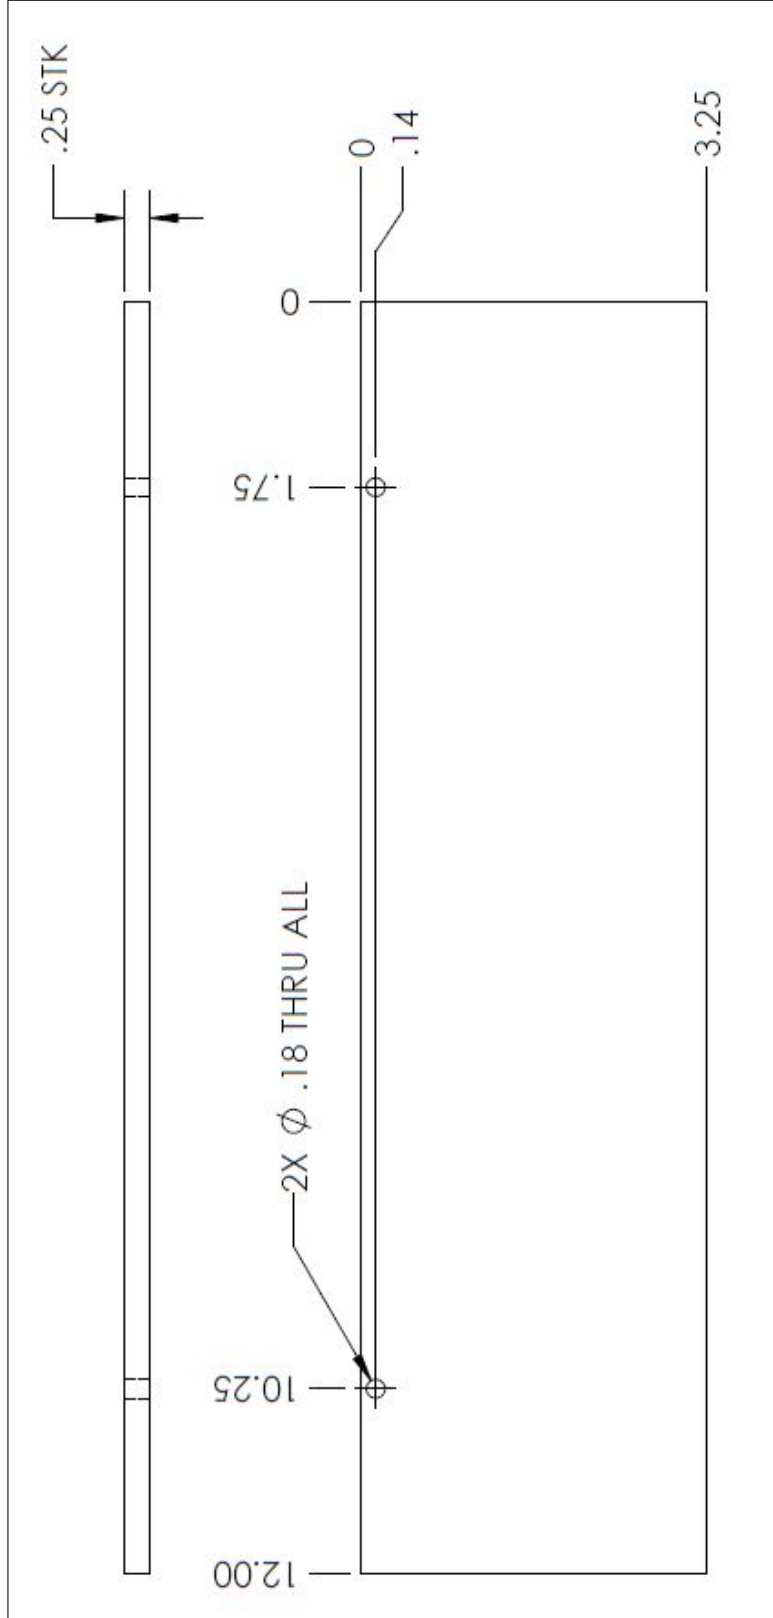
Mobile Base - Pinion Cover Detail. Material: PMMA. UNLESS OTHERWISE SPECIFIED, ALL DIMENSIONS ARE IN INCHES.
